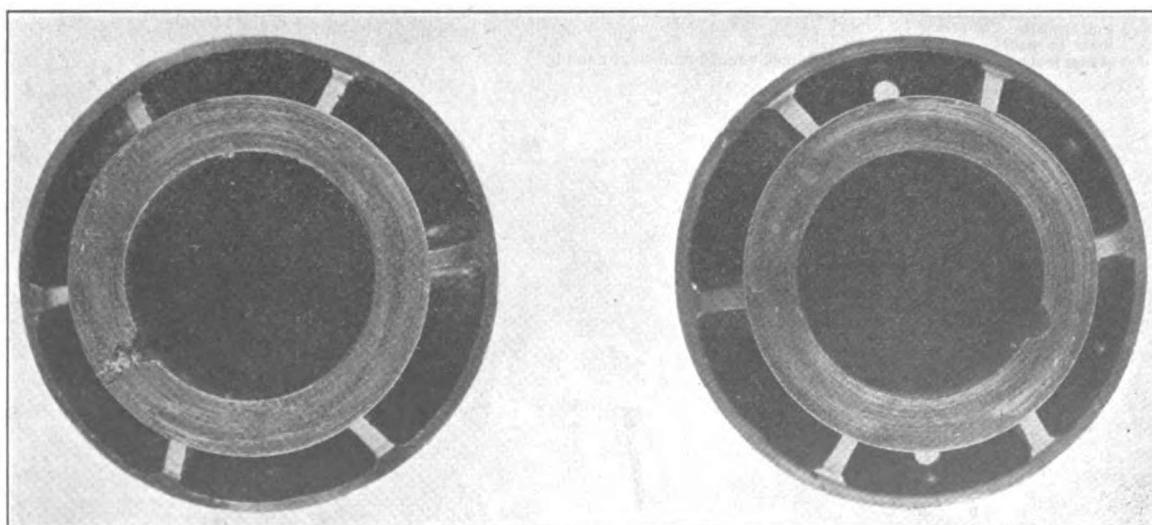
Camshaft drive-shaft bearings (lower) after preliminary runs on dynamometer.
